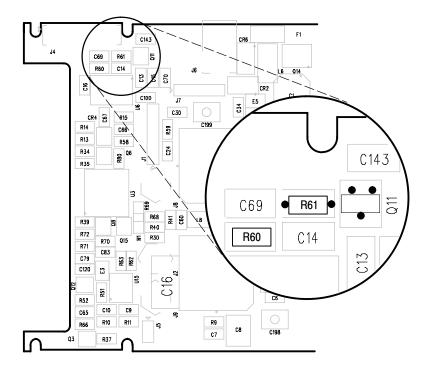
Partial Main circuit board (SDA601) showing location of changed parts
